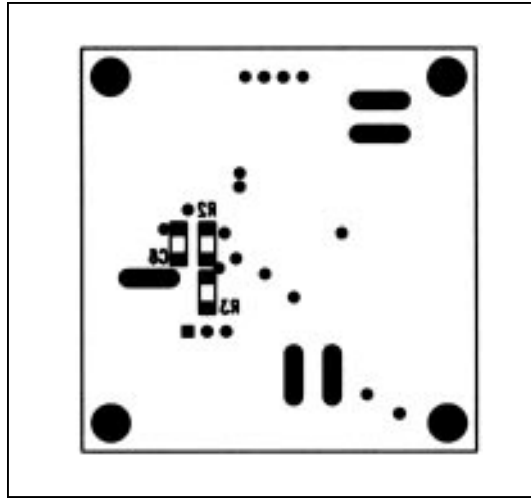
MAX608 EV Kit Component Placement Guide—Solder Side
